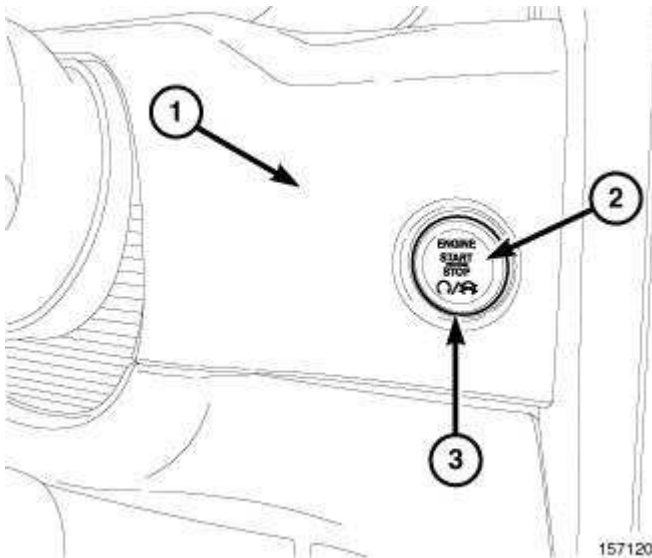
Identifying Instrument Panel, Button & Chrome Bezel Ring
